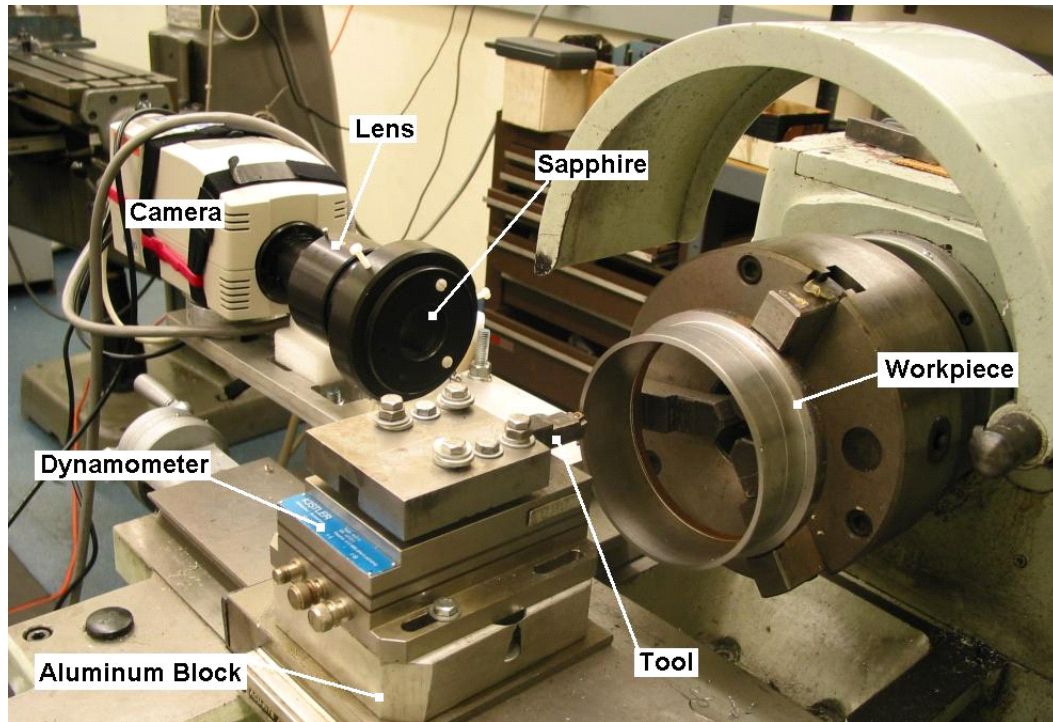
(b) Another view of the temperature measurement setup showing the camera, lens, sapphire, workpiece, tool, dynamometer and aluminum block.
